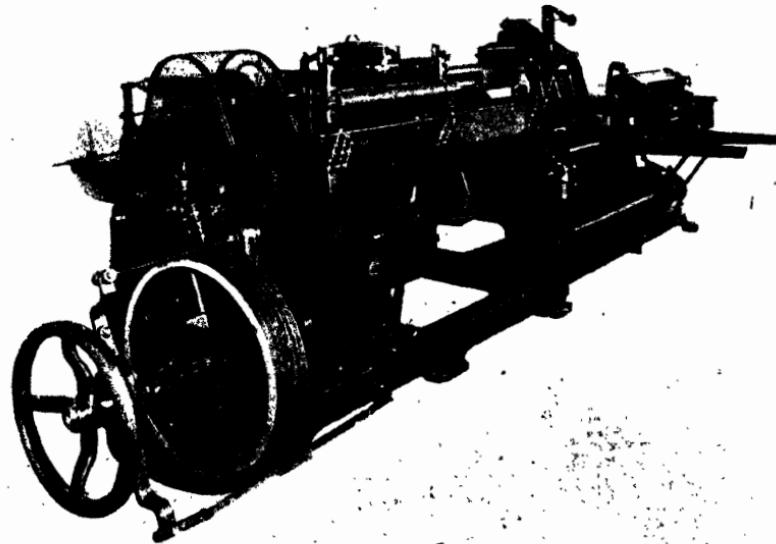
Spiral tube winder with wire-mesh gear guards. (Courtesy of the M. D. Knowlton Company.)
